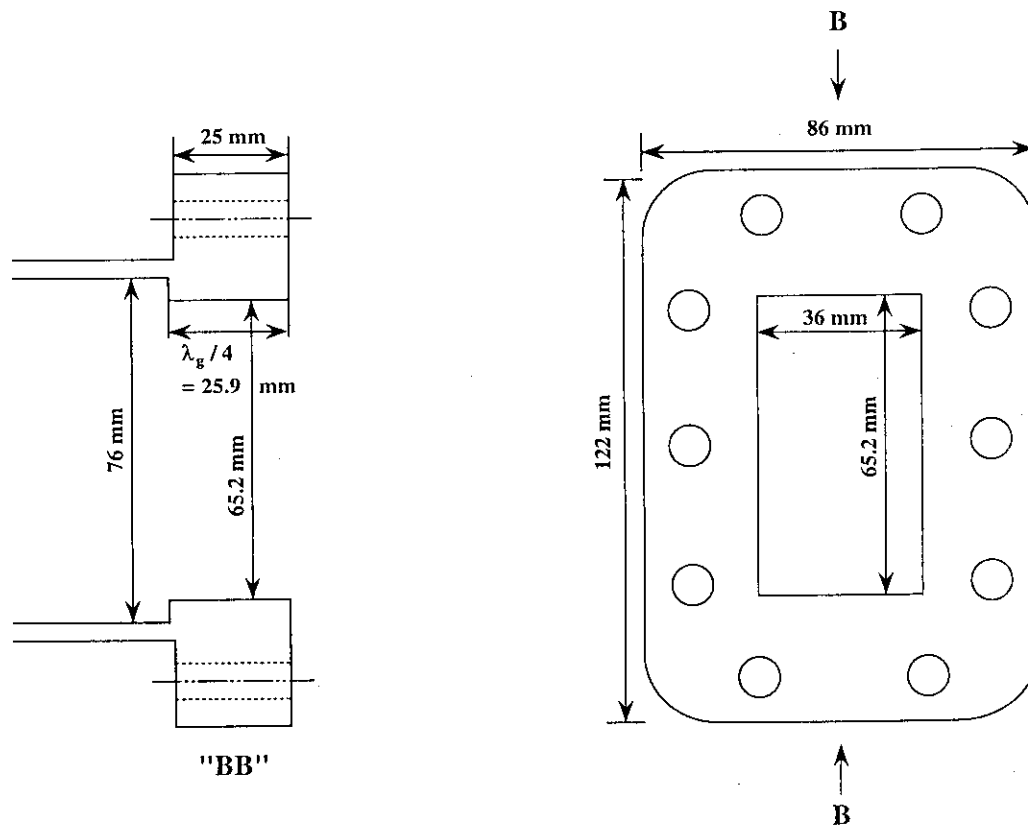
Schematic drawing of a CEA connection waveguide flange.
